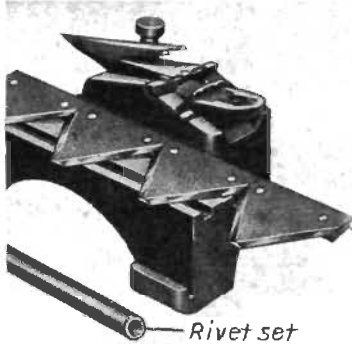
Special anvil for removing and replacing ledger plates and knife sections.
